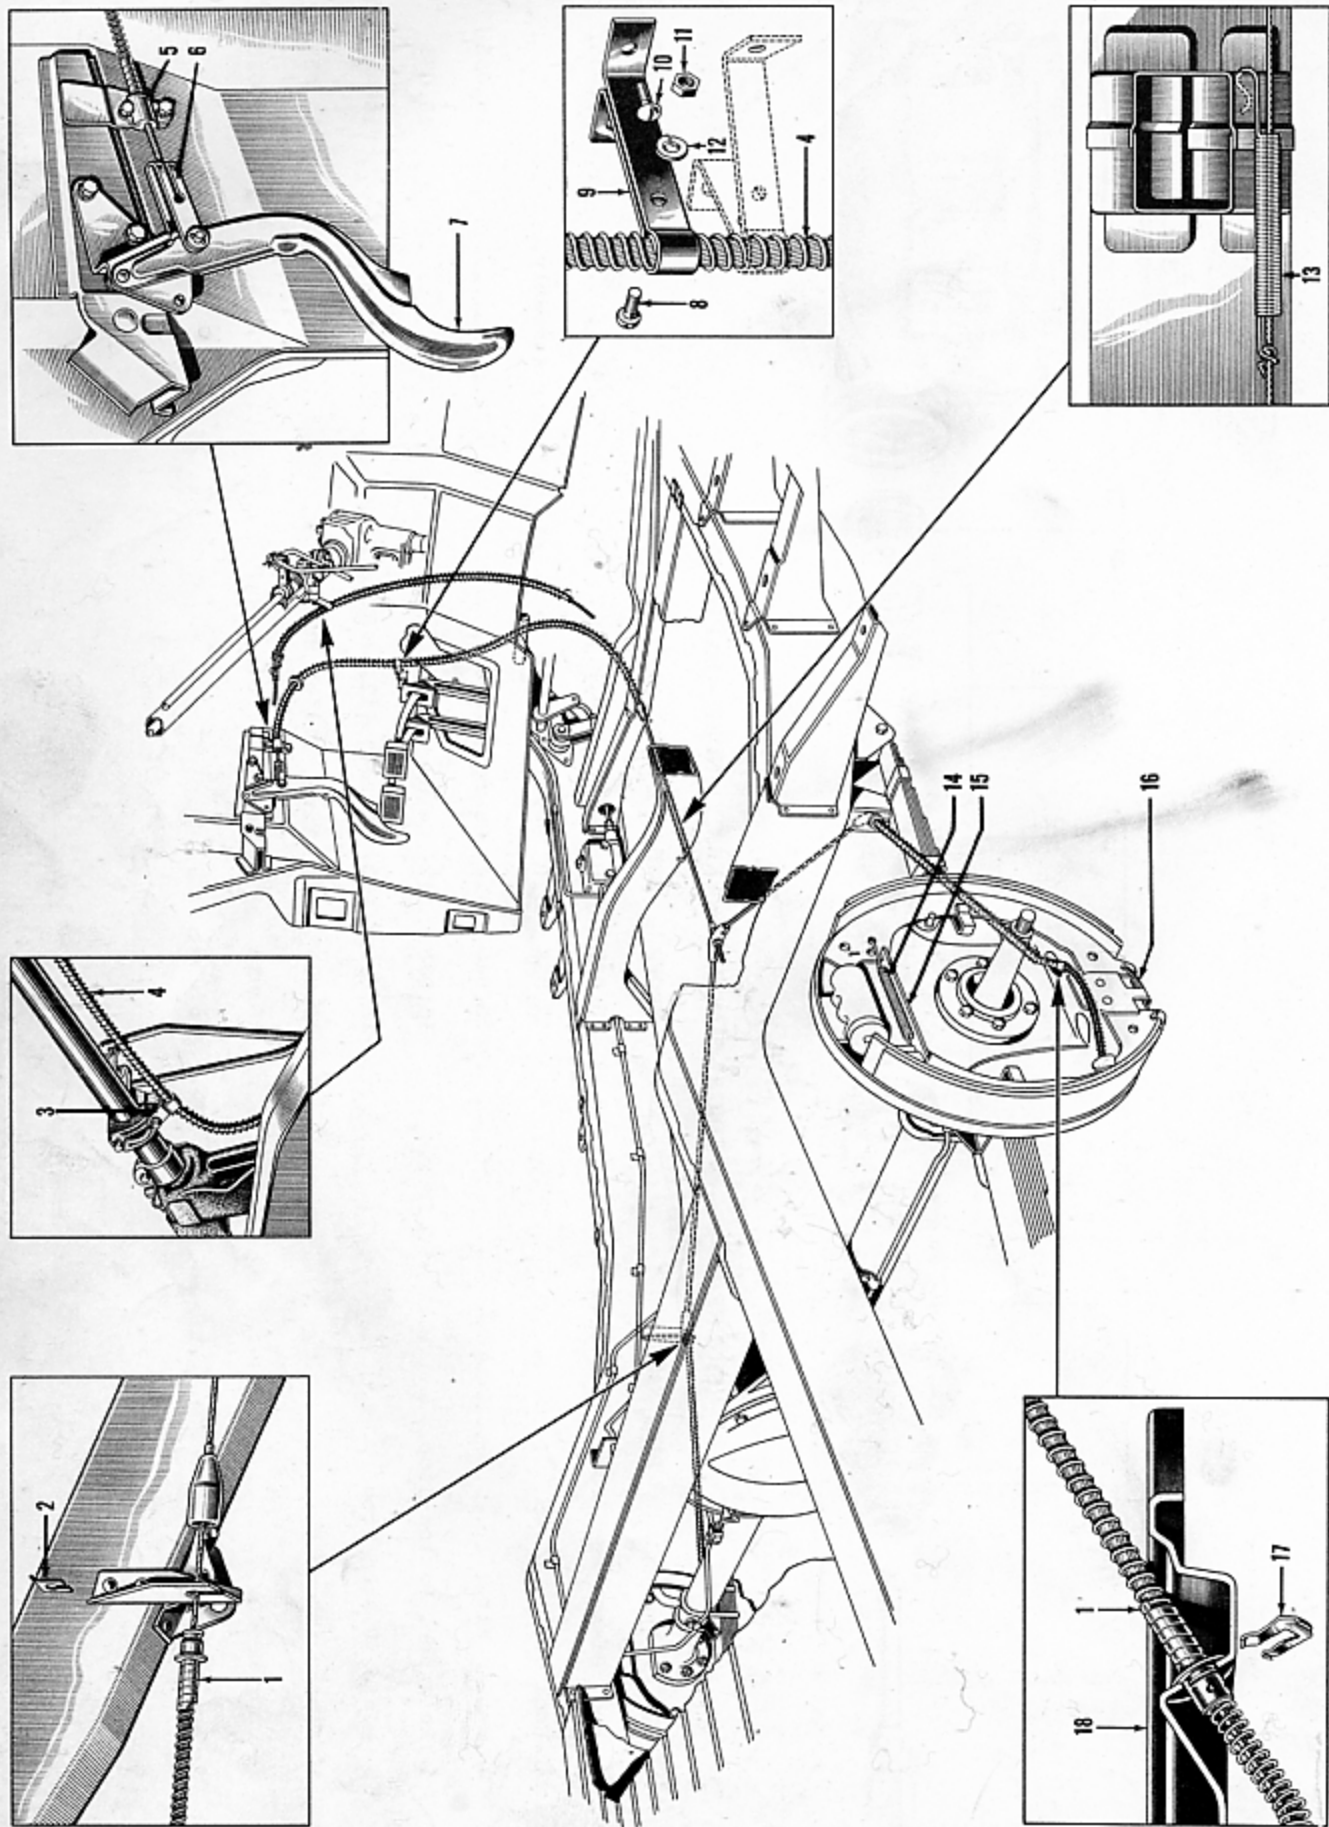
HAND BRAKE LEVER AND LINKAGE - EXPLODED VIEW
